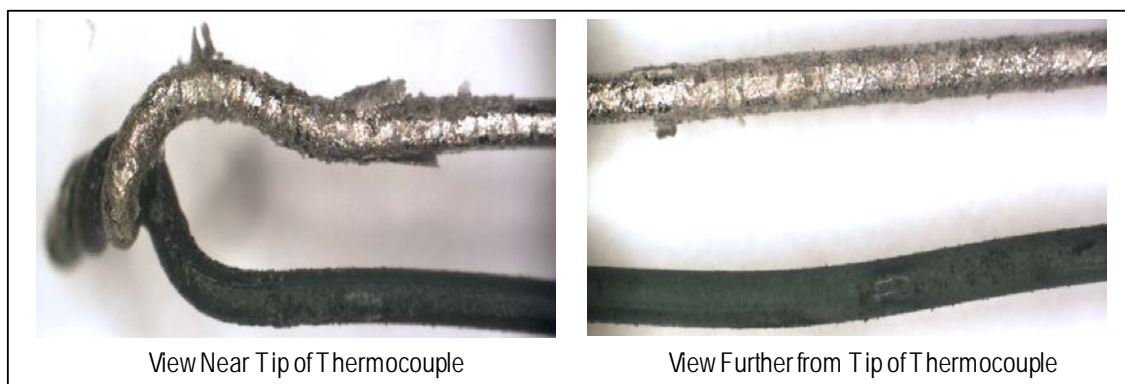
Corrosion Attack and Micro-Cracking of Thermocouple.
